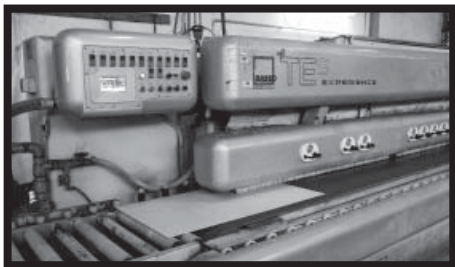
To shape and polish the edge of the slab, use diamond/abrasive discs, which are suitable for obtaining an edge of the shape and size requested. Finish the edge with a polishing disc. Different discs are available for obtaining different edge finishes. Operating speed must be tested beforehand.
